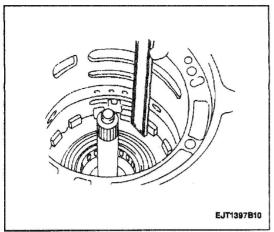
Measuring Clearance Between Reverse Brake Plate and Lugs of Transmission Case
